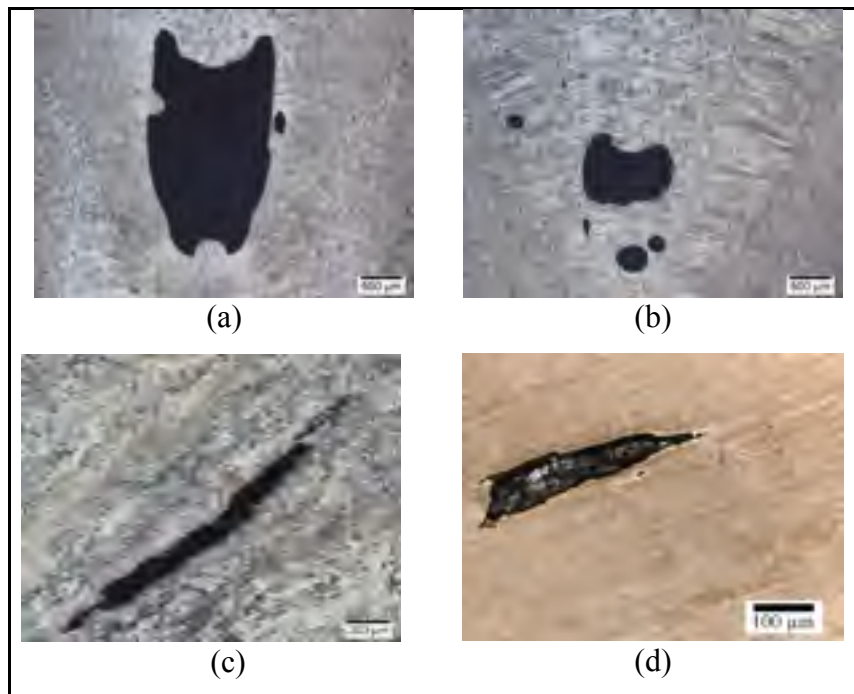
Defects observed in the weld cross-sections: (a,b) porosity at the bottom of second and third passes , (c,d) crack in the filling passes
